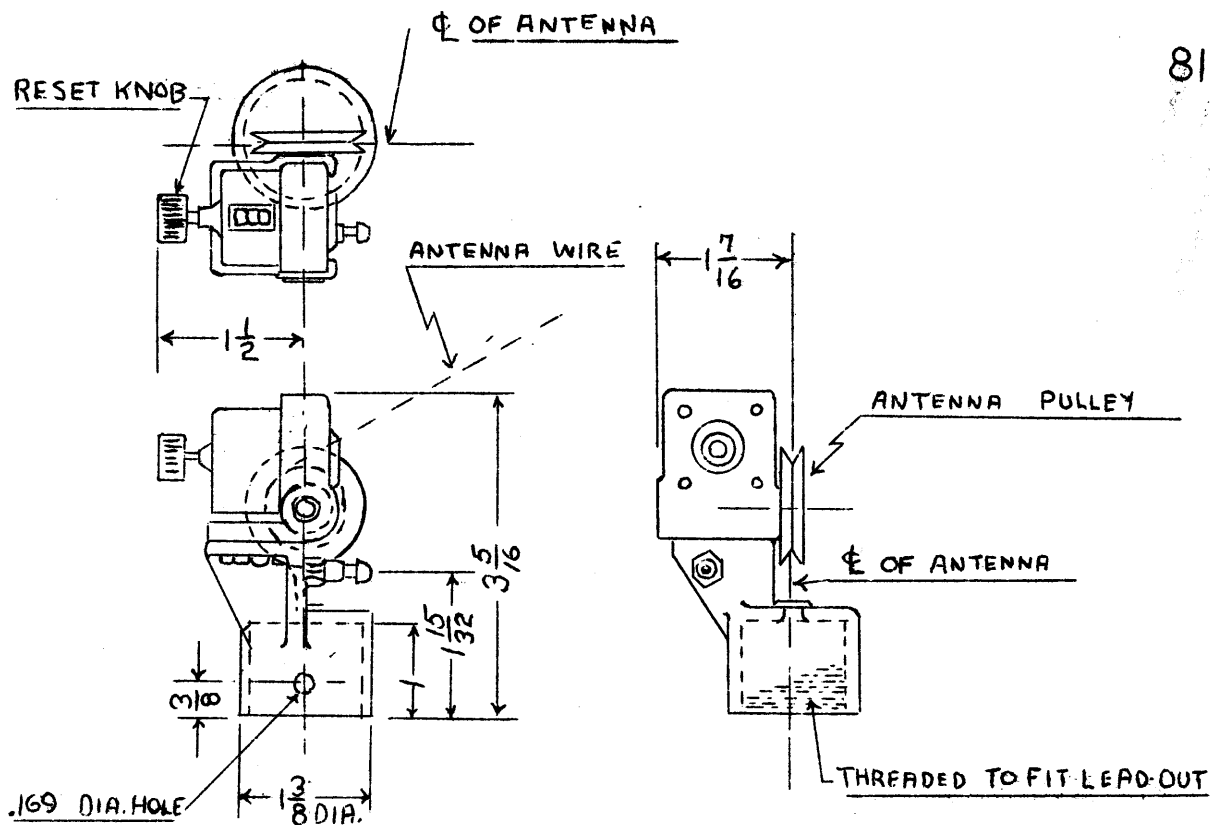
(a) COUNTER ASSEMBLY FOR USE WITH LEAD-OUT INSULATOR NAF 66405-3
